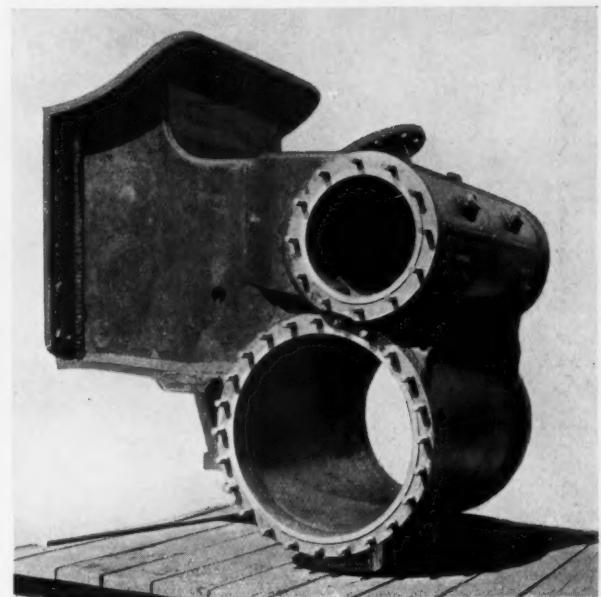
Completed cylinder and steamchest, studded and tested hydraulically
